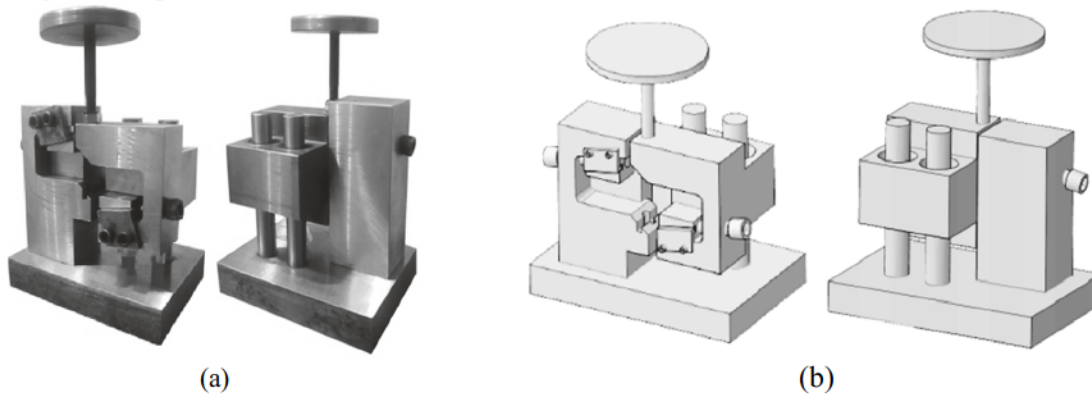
(a) and (b) depict as manufactured and model of the modified shear test fixture
